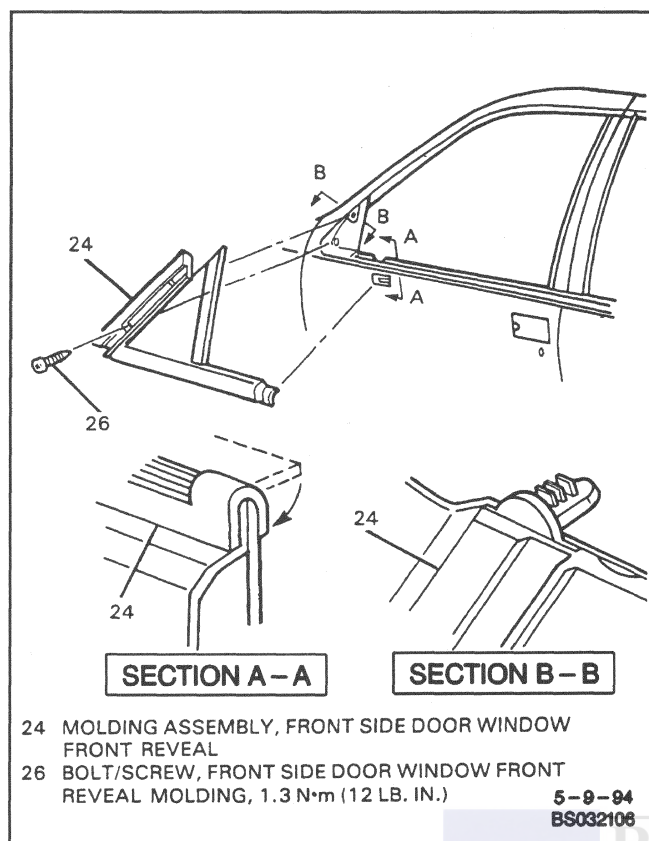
Removing Front Side Door Window Front Reveal Molding
